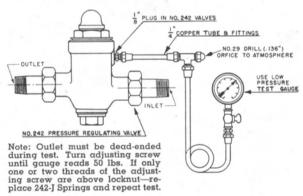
Showing test assembly used with the No. 242 Pressure Regulating Valve.
